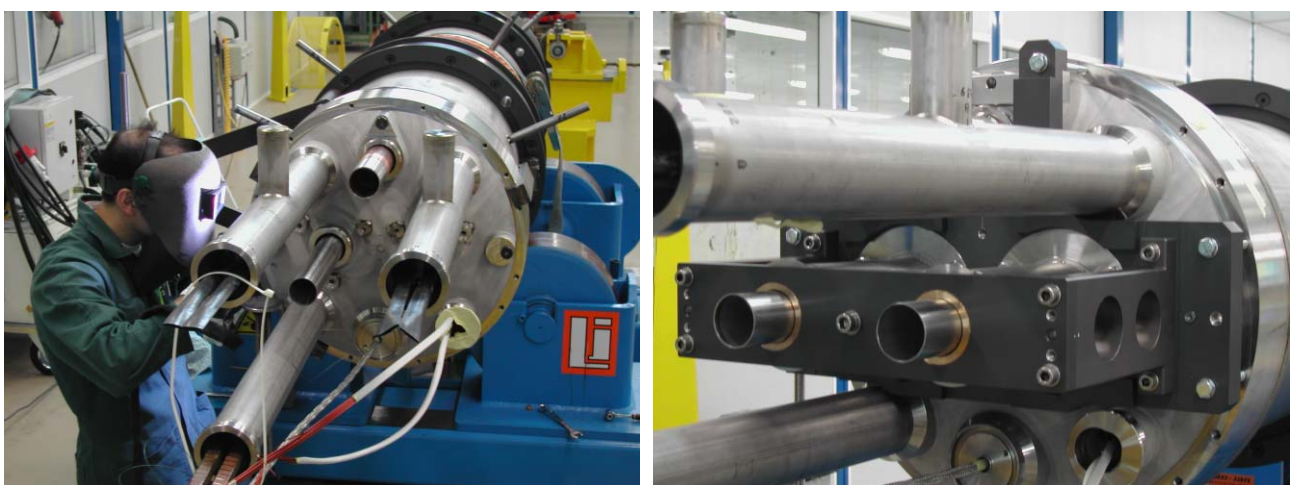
(Left) Positioning of the end covers before final orbital welding. (Right) Positioning of the BPM supports on the connection end of the Q9 quadrupole.
